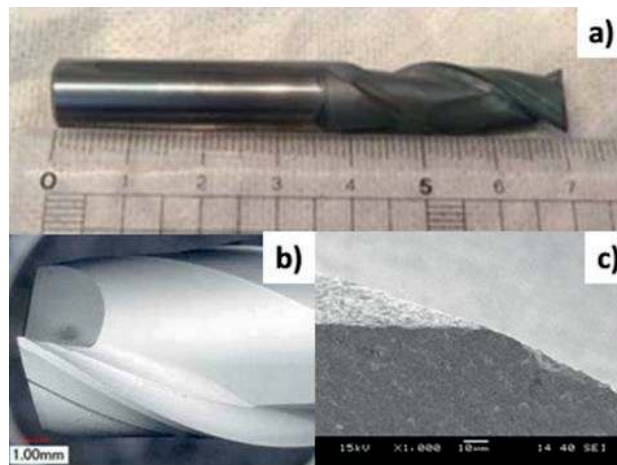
Ashing of CVD-diamond coating on the WC (Co) standard specimen under (250 V; -650 V; 30 Pa; 3.6 ks). (a) Surface of ashed specimen before cleansing, (b) Ashed tool edge, (c) SEM image of tool edge.
